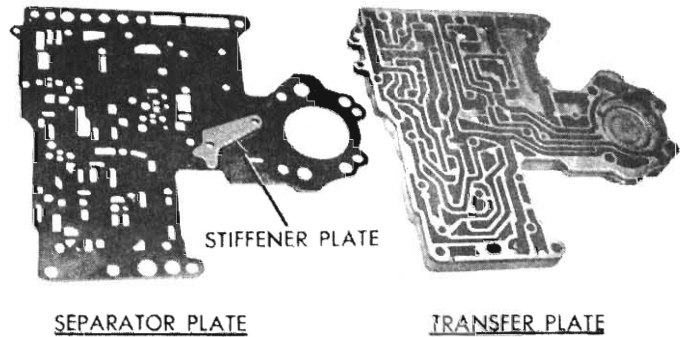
Transfer and separator plate (A-727 and A-904-LA)
